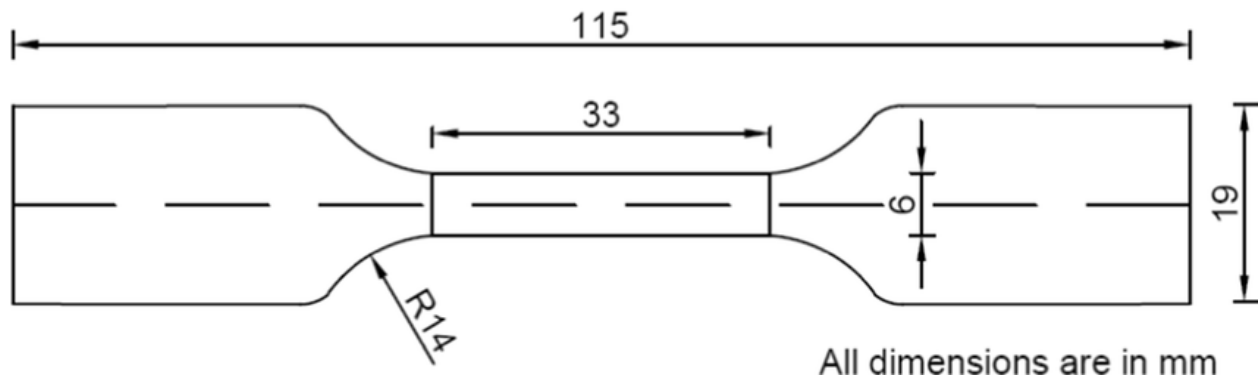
Tensile Test specimen (ASTM E8)
